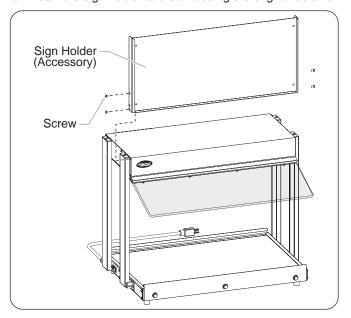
Installing Sign Holder (GRHW-1SG model shown)
